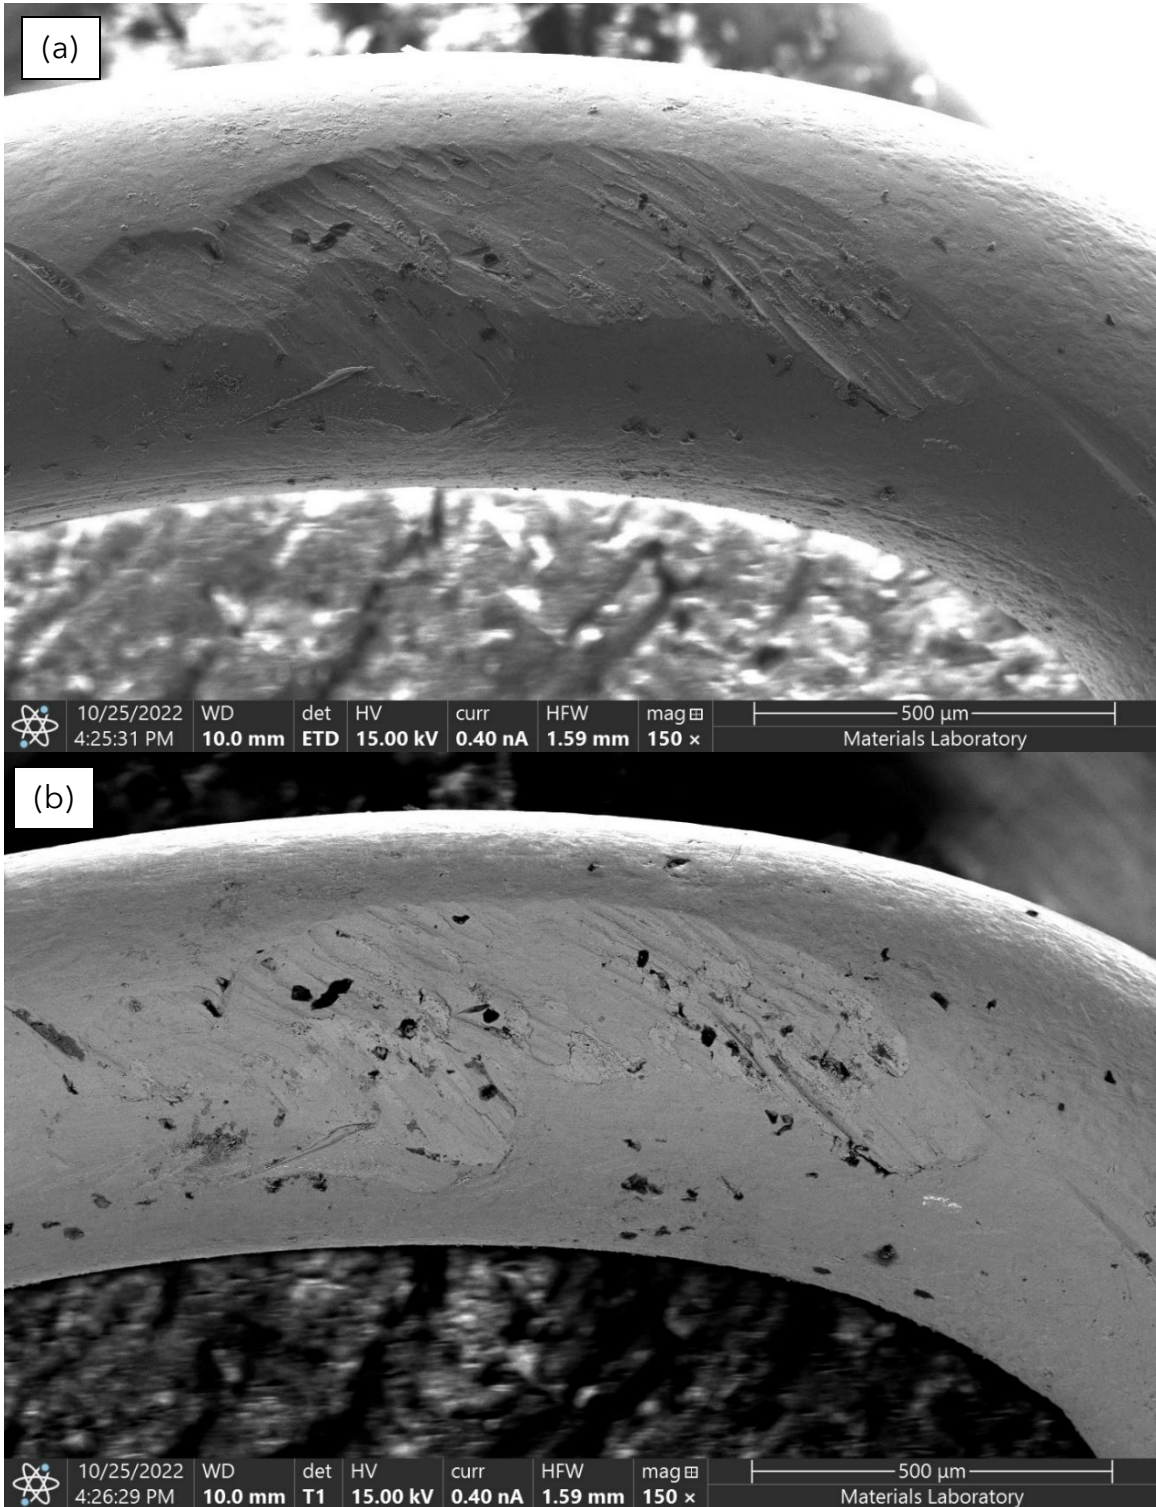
View of the worn wire holes of an exemplar cap from the same assembly.
